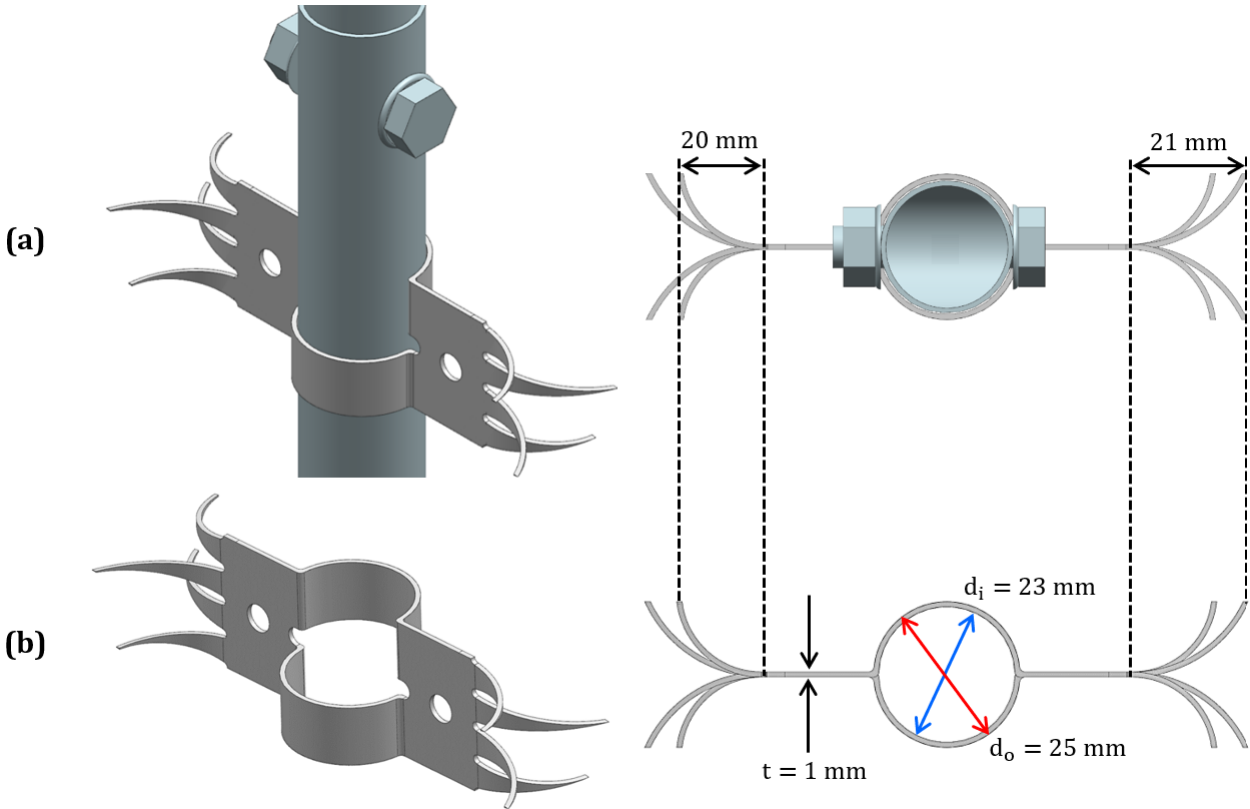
Dimensions for G-spike electrode with three spike assemblies
